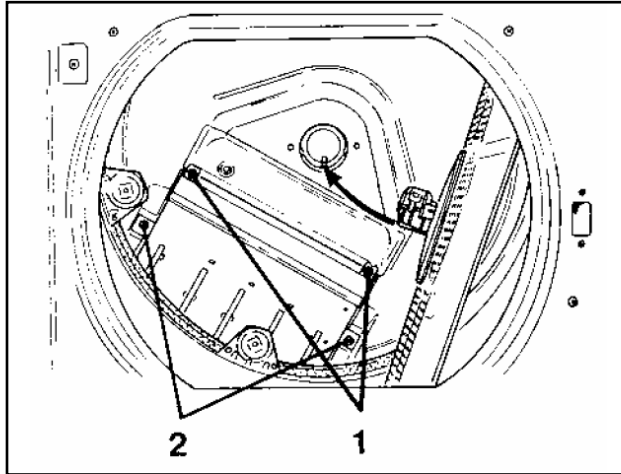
Heater Bank Removal (from Machine Nos. Prefix 10/... or 11/...)
